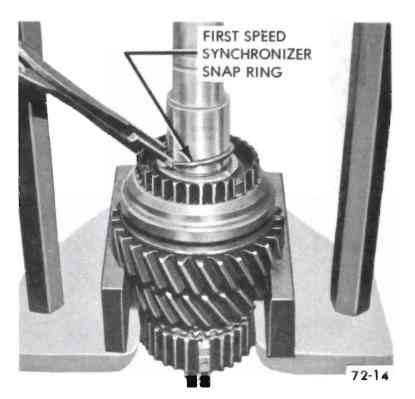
Removing First Speed Synchronizer Snap Ring
